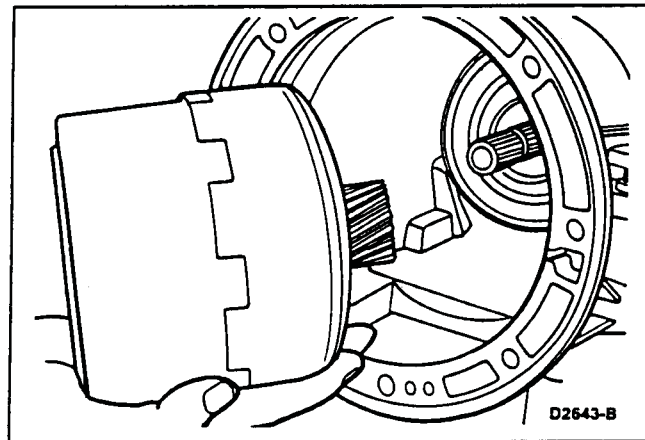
Intermediate Brake and Forward Planet Assembly Removal
